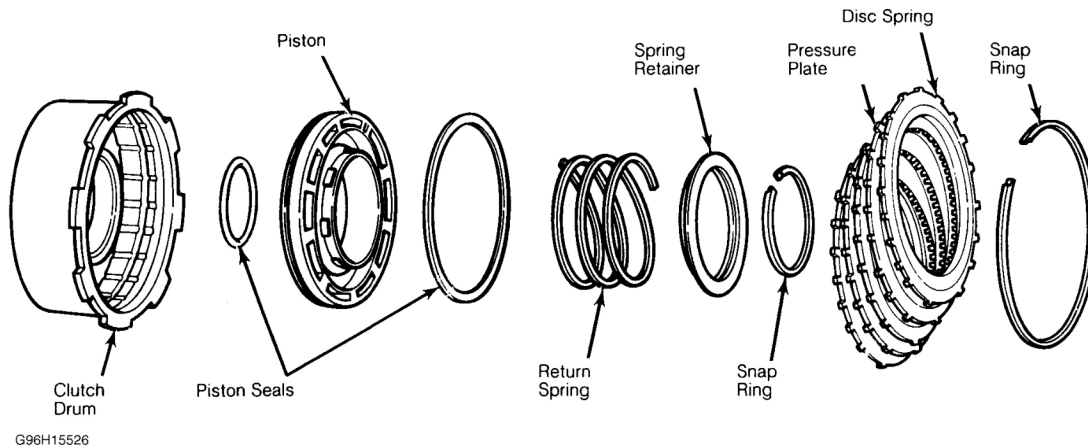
Exploded View Of Reverse-High Clutch Assembly
